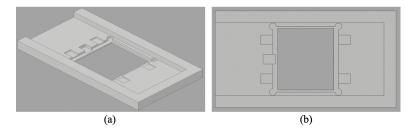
CAD drawing of the 3D printed array holder designed to be mounted on a lens holder: (a) tilted view, (b) top view.
